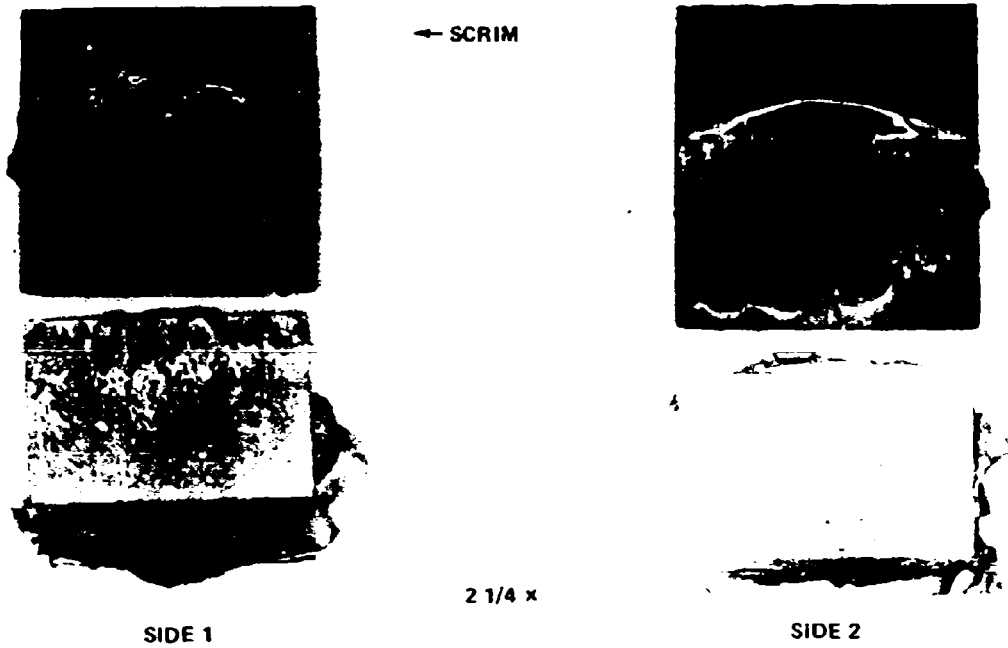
ENLARGED PHOTO OF BOND FAILURE ON Z4824824-507 SPECIMEN
